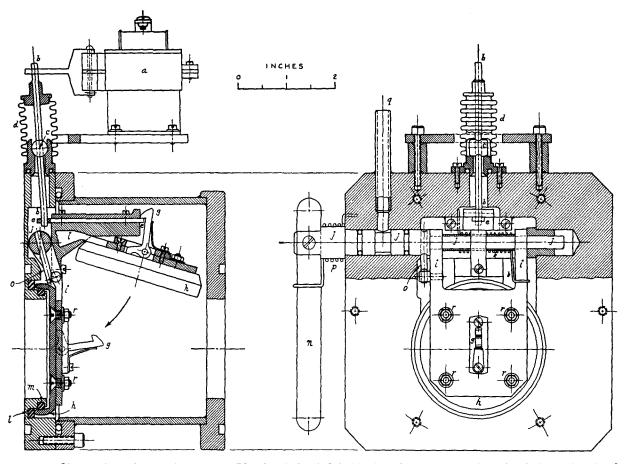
A fast-closing valve of 2-in aperture. The electrical switch inside the valve has been omitted for clarity. Left—Valve with swinging gate shown in both open and closed positions. Right—Valve in closed position; solenoid and vacuum-tight enclosure are omitted in this view.
